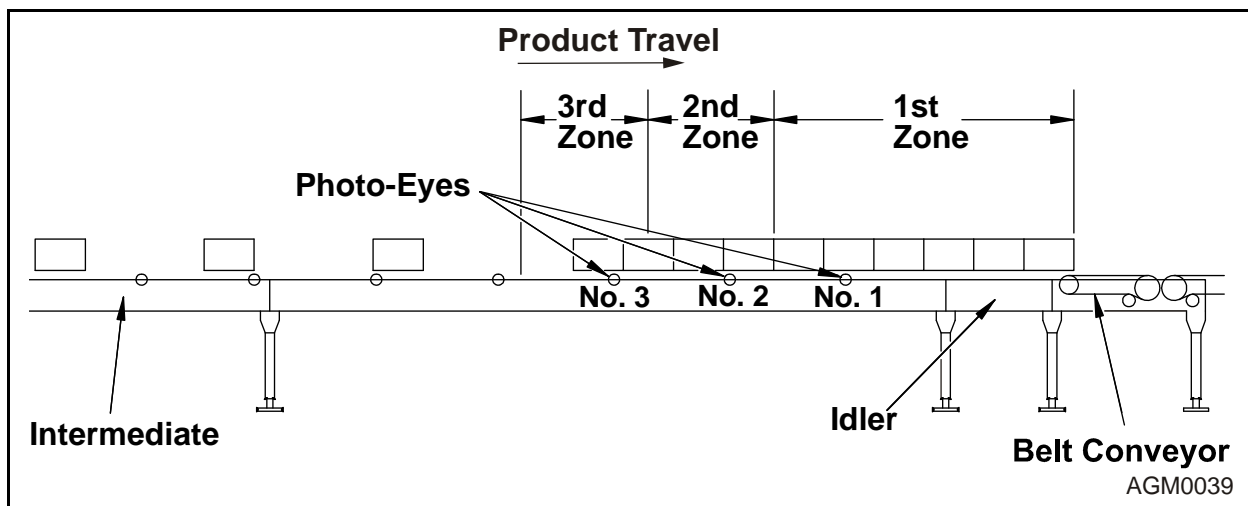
9 Accumulation Control - Brake/Meter-Type Belt Conveyor
